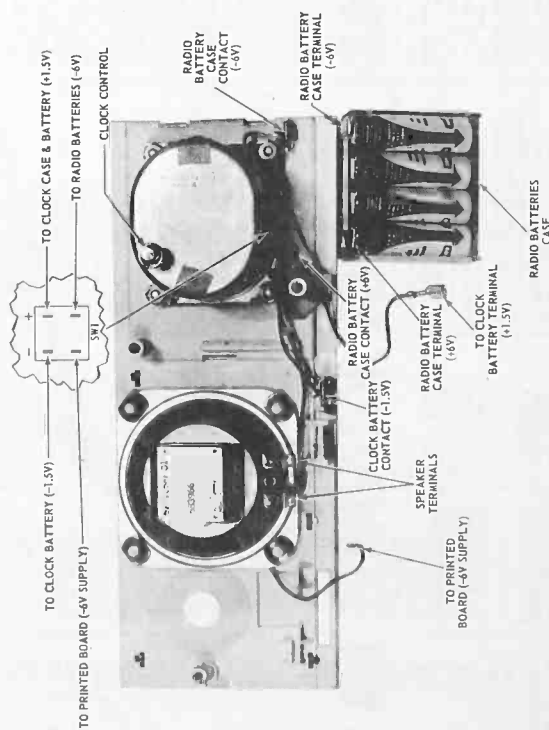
Rear view of cabinet front with printed circuit chassis removed.
